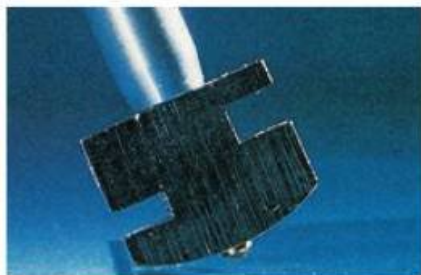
Diamond-tipped cutters are used to etch hard surfaces.
